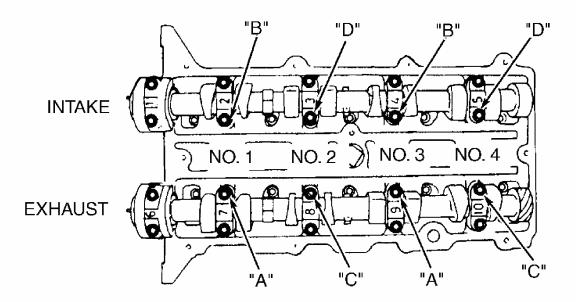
Aligning Valve Tappet Holder Courtesy of MAZDA MOTOR CORP.
